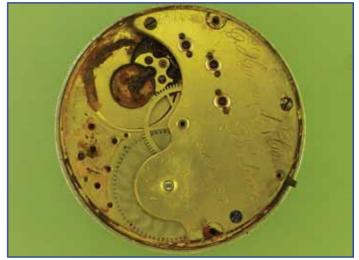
Removal of the balance cock revealed a hint of the rust inside.
